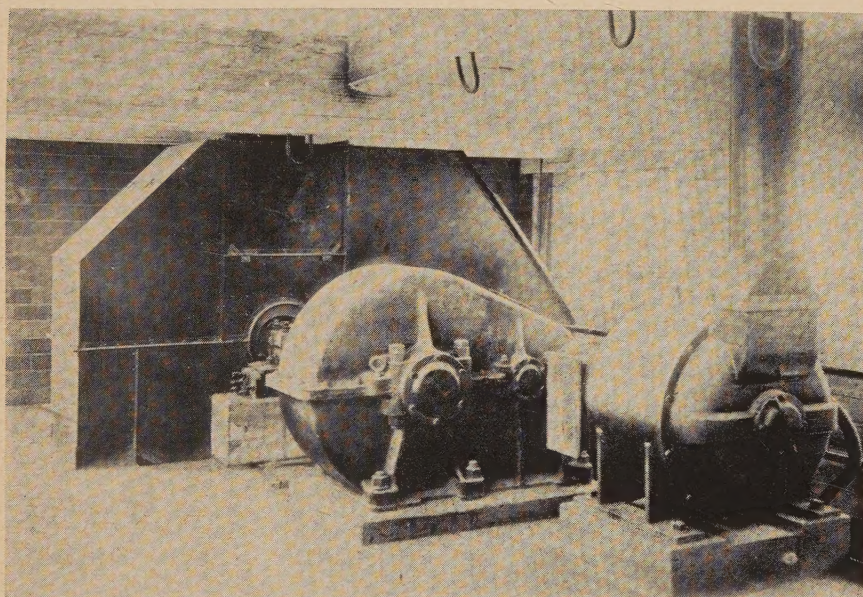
Showing a 125 hp. double reduction tandem type herringbone gear speed reducer operating elevator legs.
